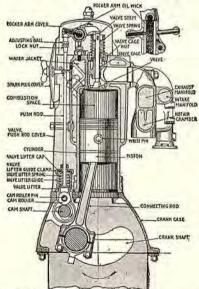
Buick 1920-1923 six-cylinder engine (above) has both inlet and exhaust valves placed in-the-head of the cylinder and is a typical type of engine with valves-in-the-head. The valves are in cages which can be removed for grinding. On models 1924 and later, cages are not used. The cylinder head is detachable and valves are ground to seats in head. See Specifications, pages 1955-1962, for specifications of later engine.
